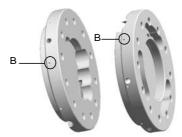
Seven holes B, on a radius of x mm from axis 6 center on the two insulated tool flanges.
